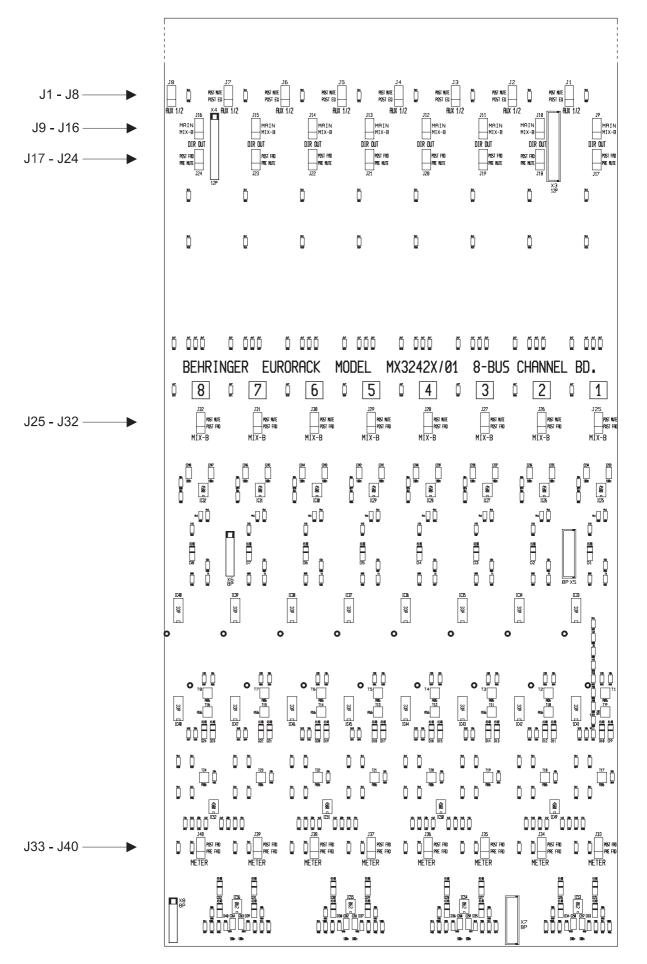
Partial view of pc board carrying 8 mono and 8 Mix-B input channels
